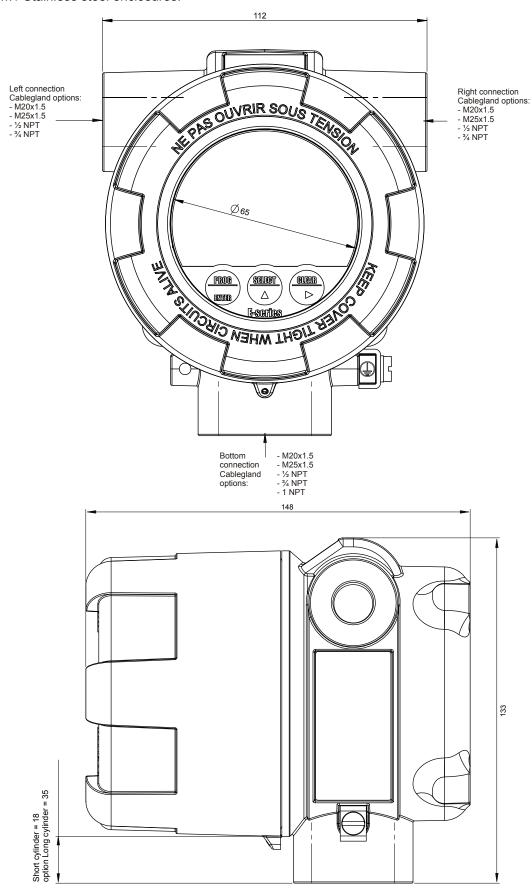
Dimensions aluminum / Stainless Steel enclosures.3/4
